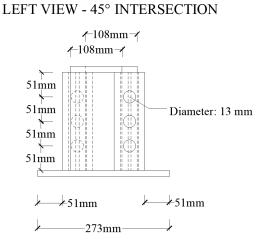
Plexiglass Fractures Left View for 45° Intersecting Angle
